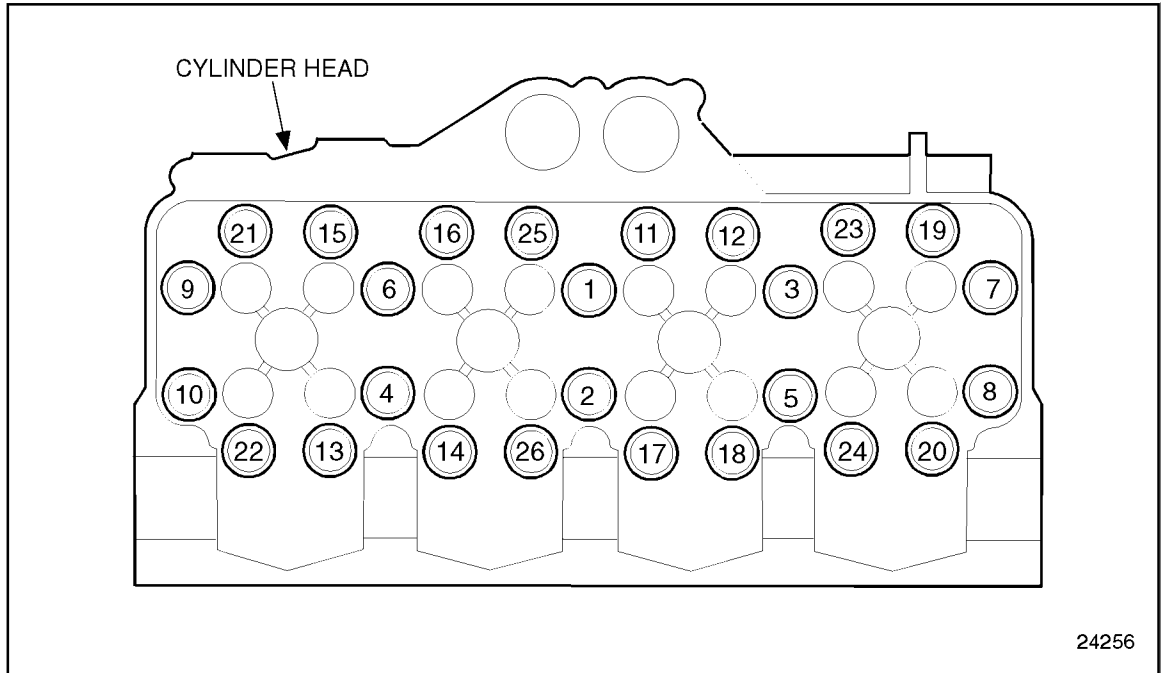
Cylinder Head Bolt Tightening Sequence
